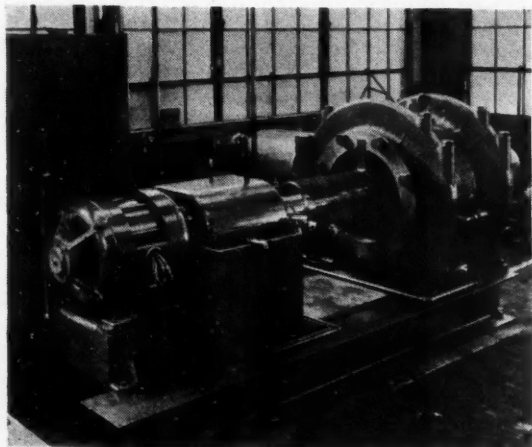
Machine for testing large anti-friction bearings (up to 24 in. outside diameter)
